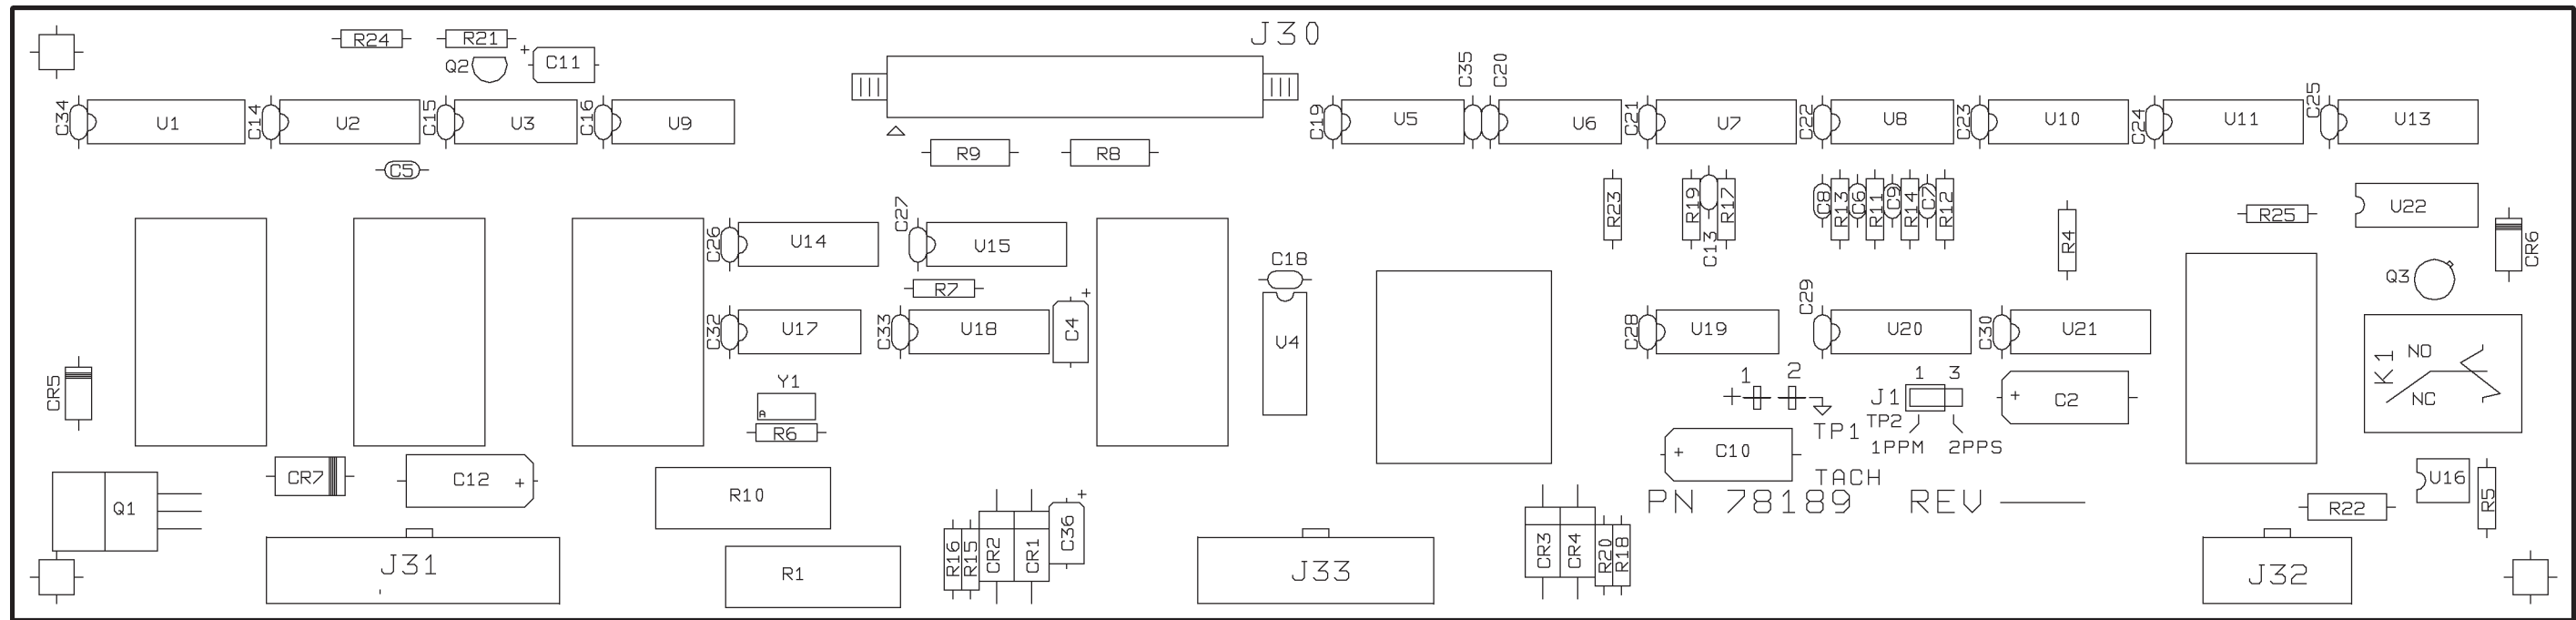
Control Printed Circuit Board Assembly, PN 78189 Revision 3
